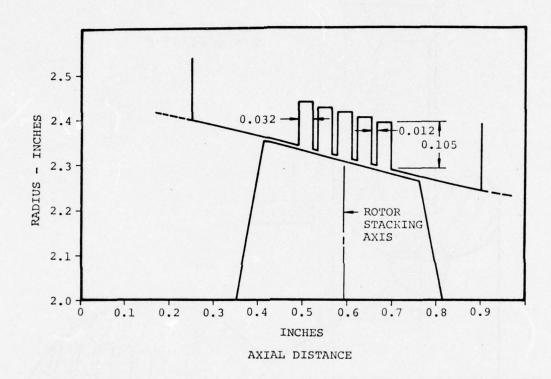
Grooved Casing Insert Design for a Small Axial Compressor.
